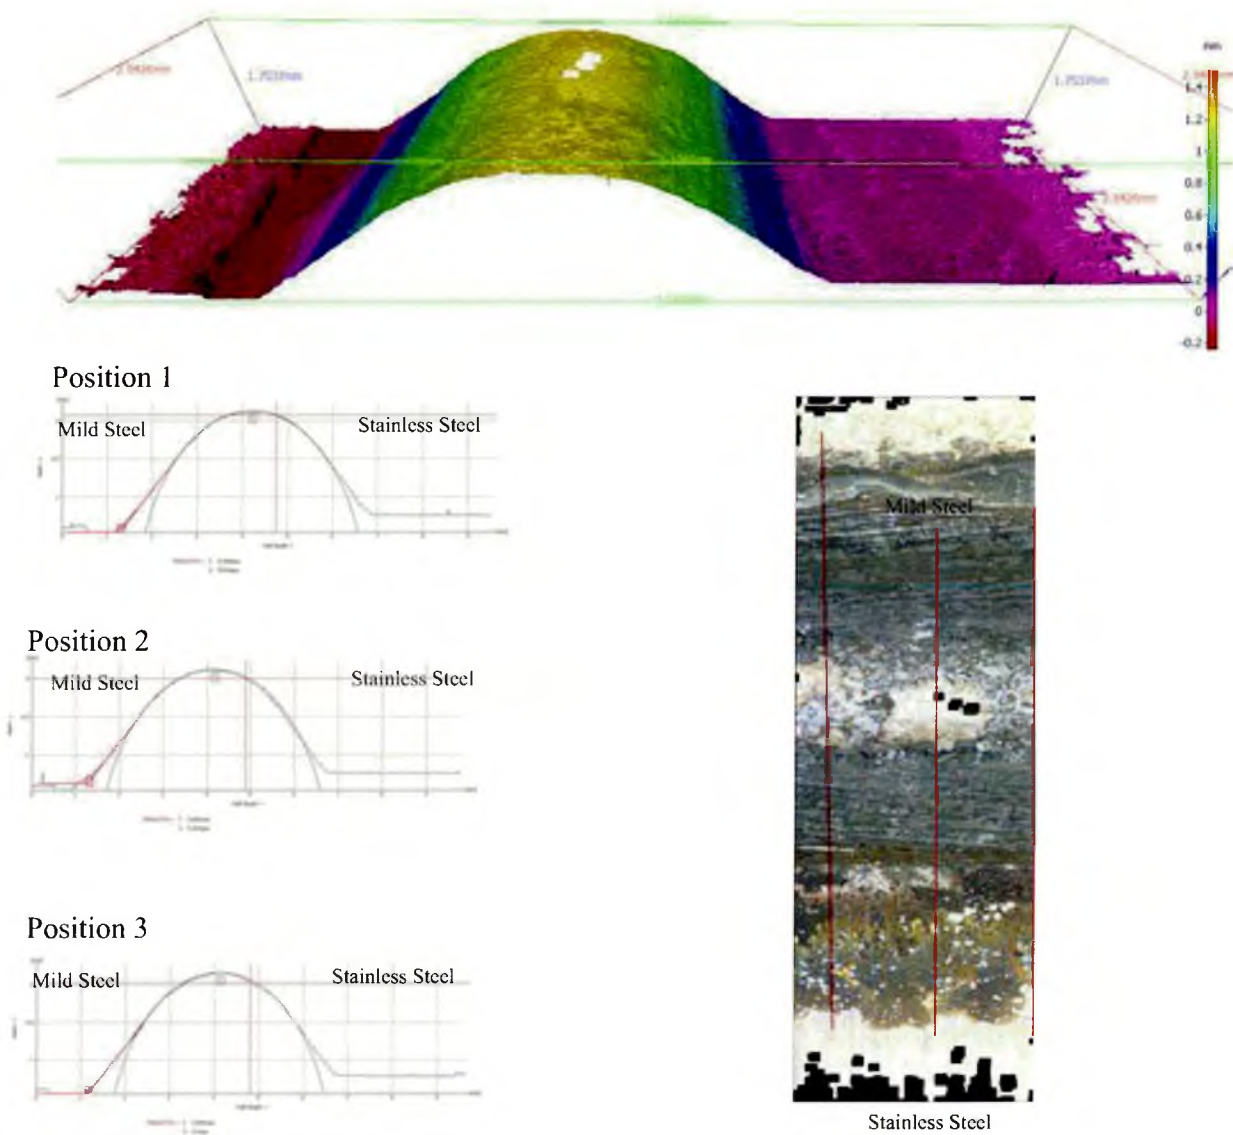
IFM 3D surface image and surface profiles for the front of the weld bead of sample C1.2.4
